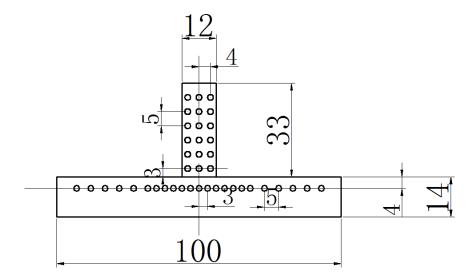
Measurement locations on the cross-section of the build plate. All dimensions are in mm.
